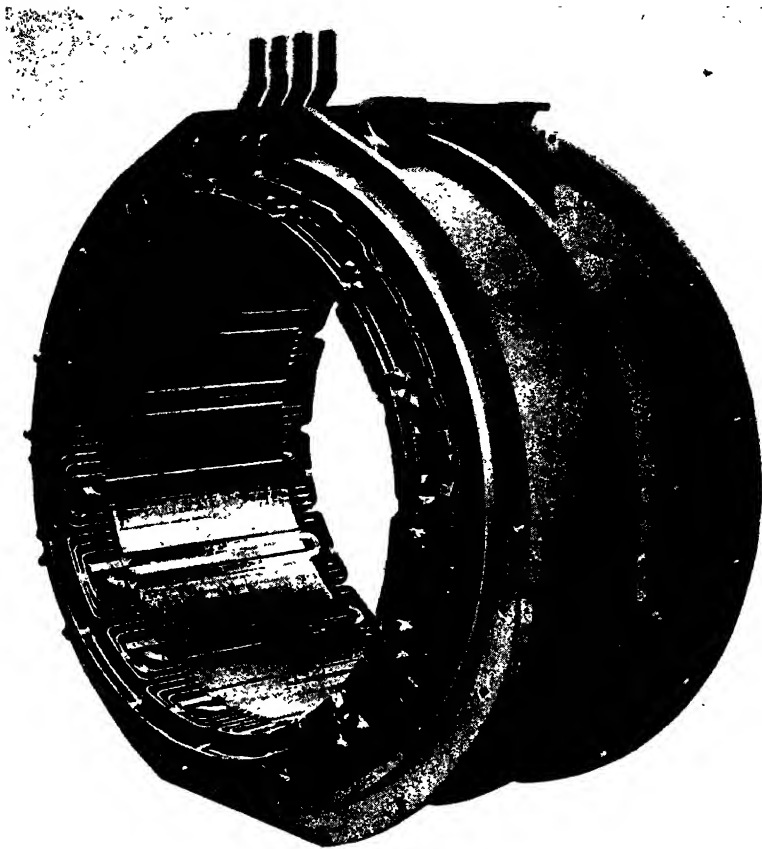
Completed Stator of Oerlikon 16-pole Single-phase Motor.
